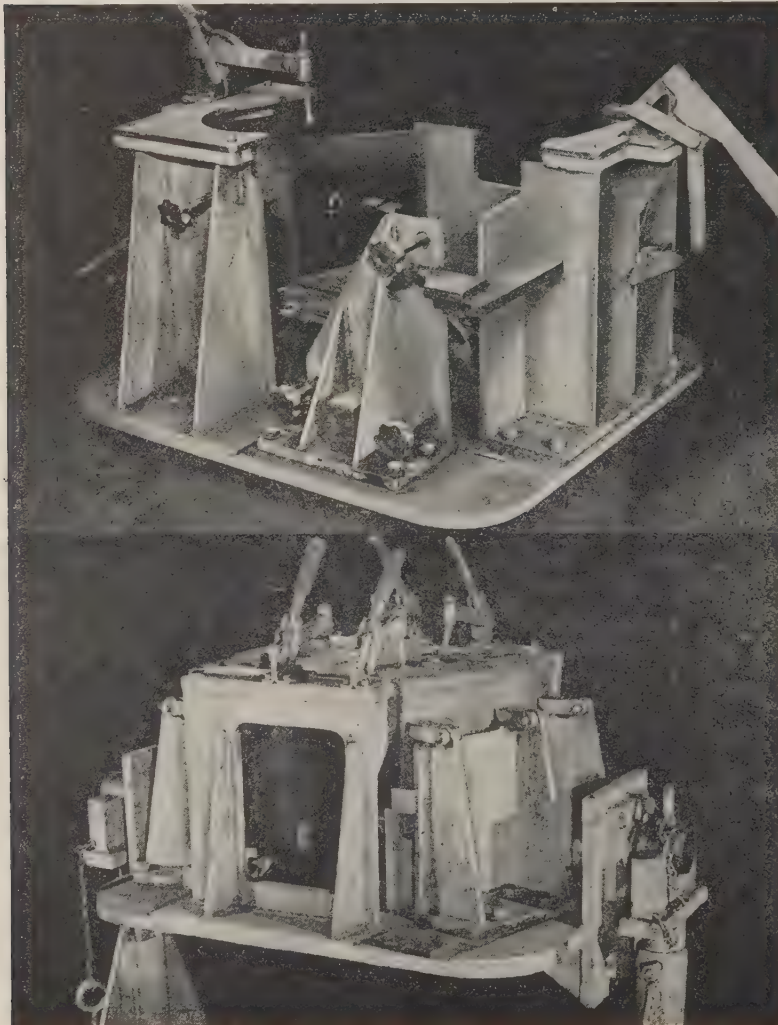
TWO SPECIALLY DESIGNED FIXTURES FOR TOOLING WELDMENTS IN QUANTITY PRODUCTION
